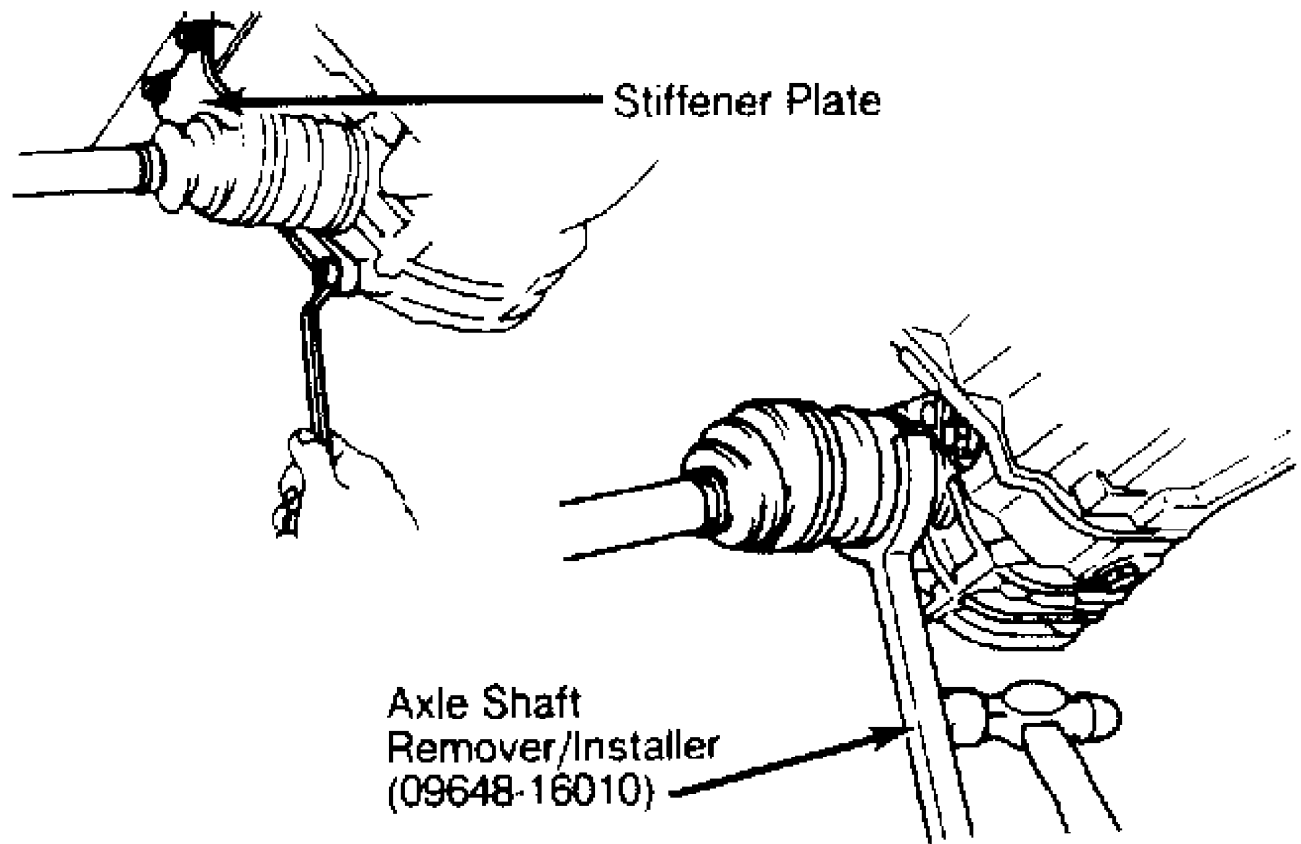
Removing Tercel Wagon Drive Axle Shaft
